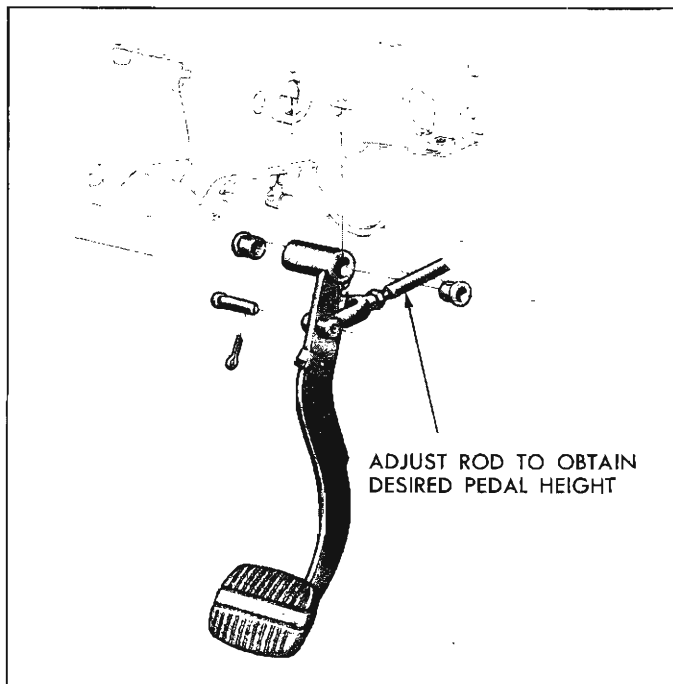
Power Brake Push Rod to Brake Pedal Attachment
